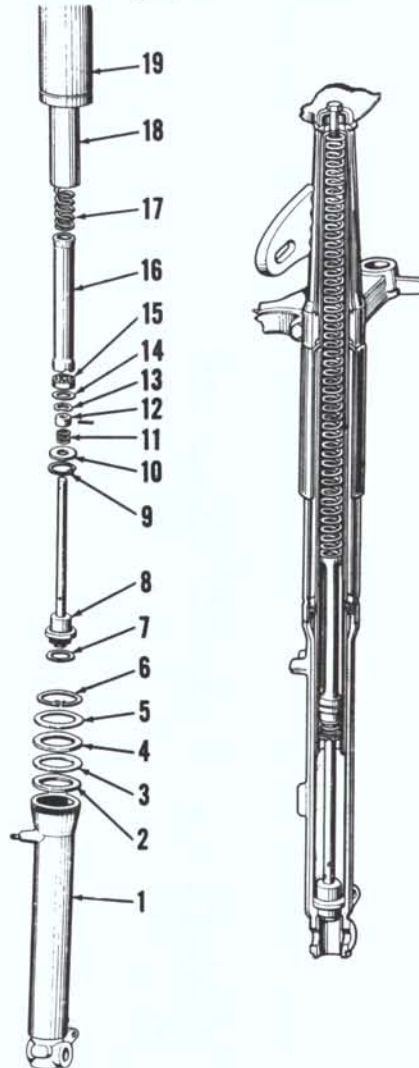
View of the front suspension unit. To disassemble, turn plug end of valve (8) clockwise through hole in bottom of lower sliding tube (1).
